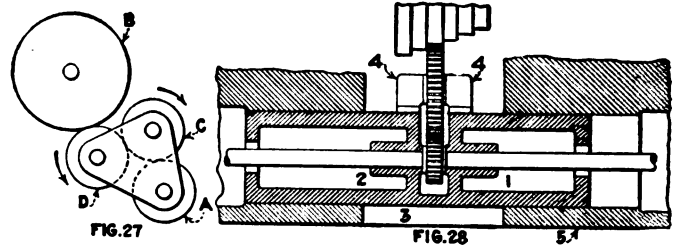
TUMBLER GEAR WITH TWO IDLERS. FIG. 28. SUCCESSFUL ARRANGEMENT FOR LIGHTER DRIVES
